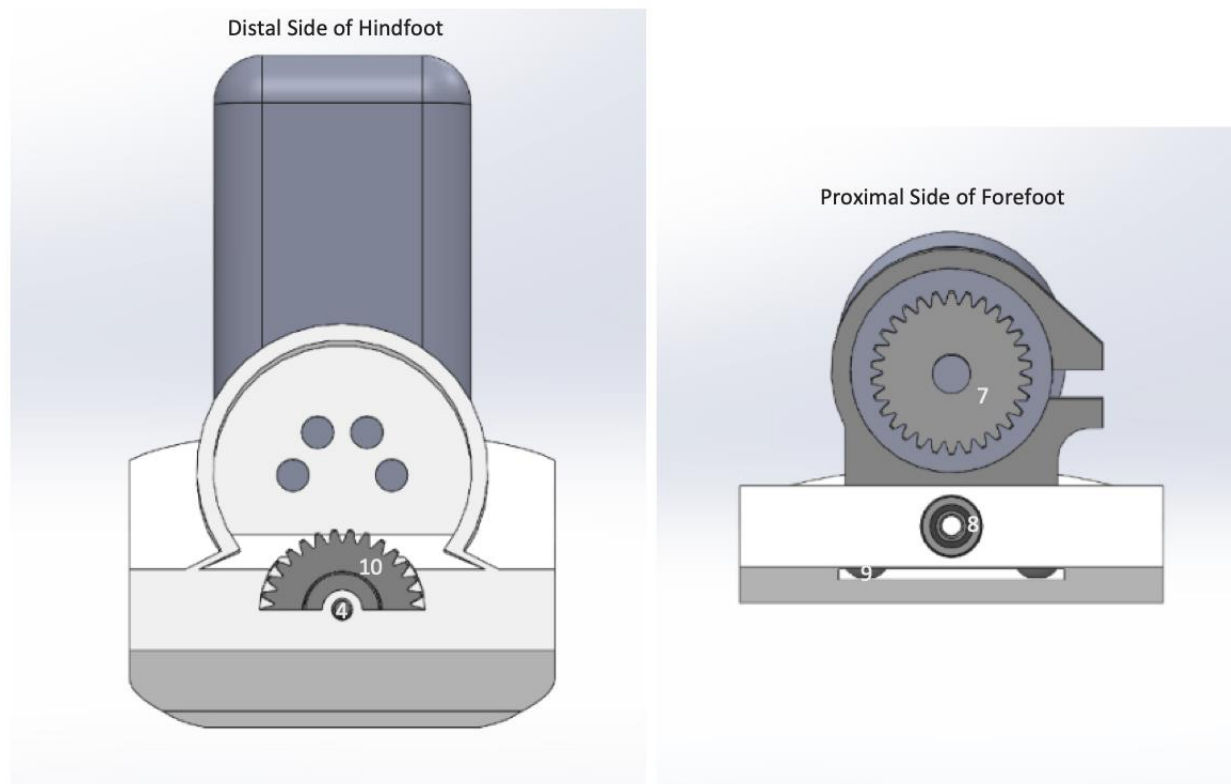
Split Subtalar View (Item 4 is the Pin, Item 7 is the Full Gear, Item 8 is the Bearing, Item 9 are the screws for the motor mount, Item 10 is the Half Gear)
